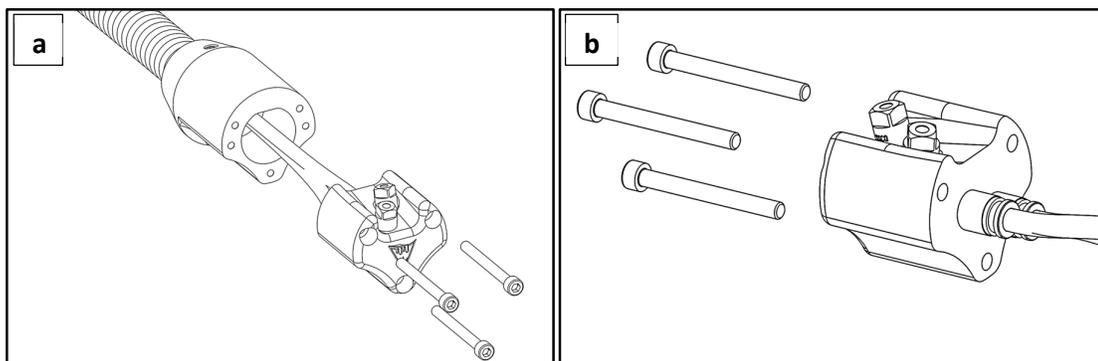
(a) Hoses pushed through spring. (b) Hoses fitted to push lock fittings.
